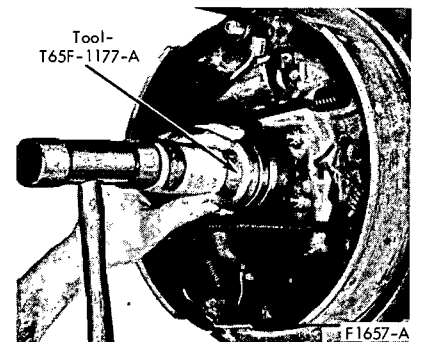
Rear Axle Shaft Bearing Seal Installation
